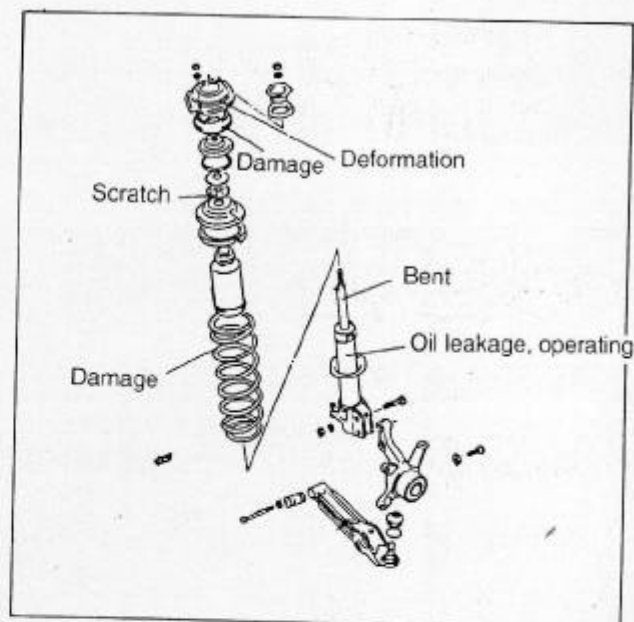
D — 8 CHECKING STRUT ASSEMBLY
